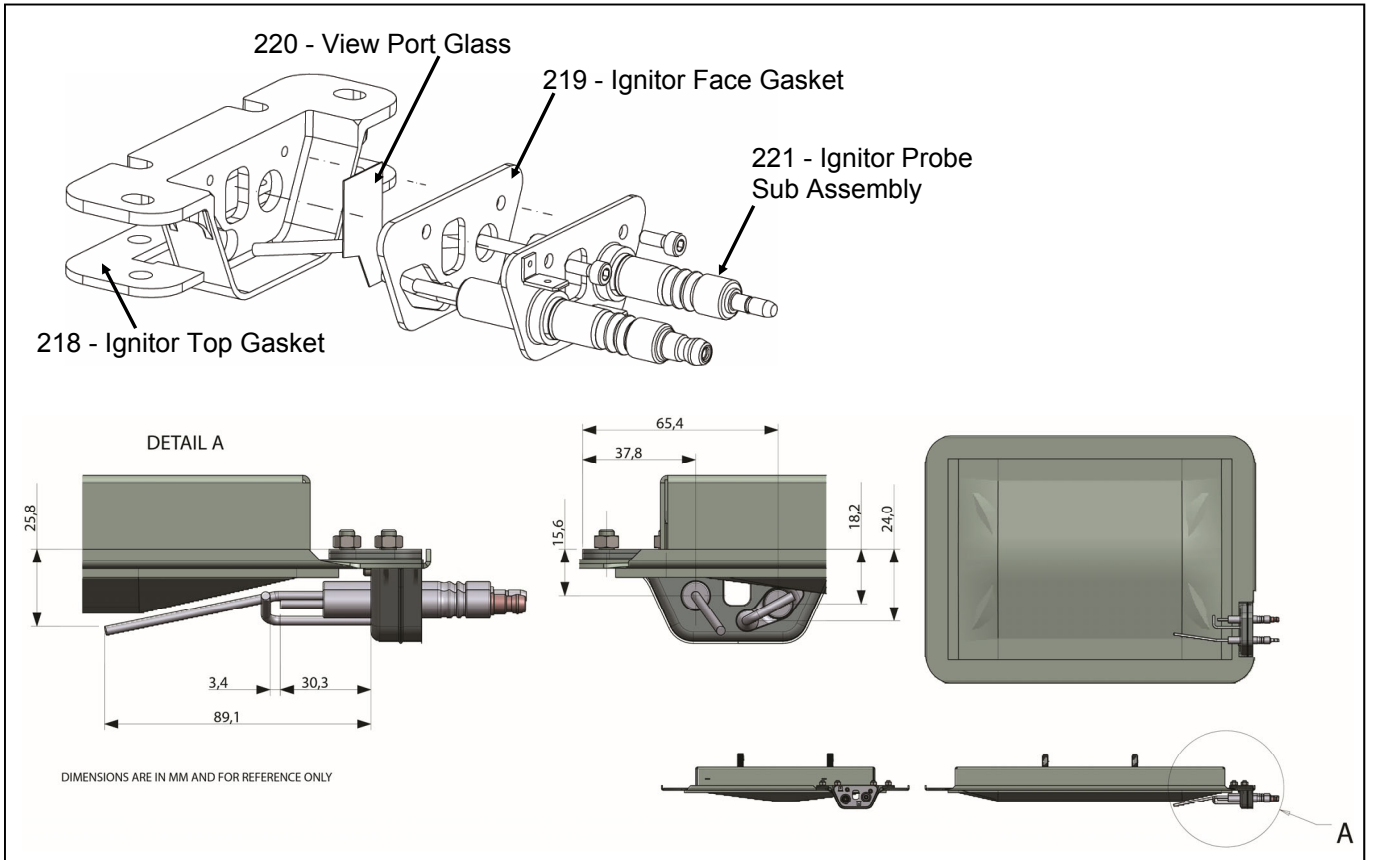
Ignition Electrode and Flame Sensing Probe Positions
